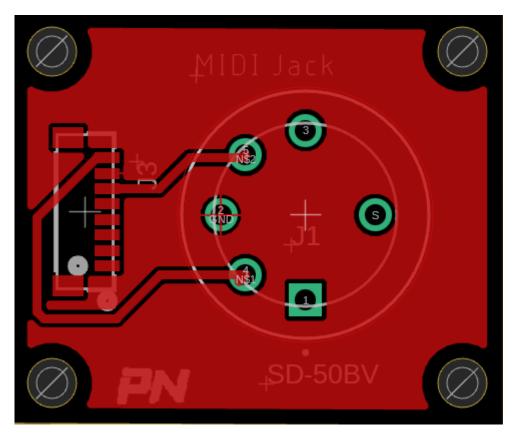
MIDI to CV Jacks PCB Board
